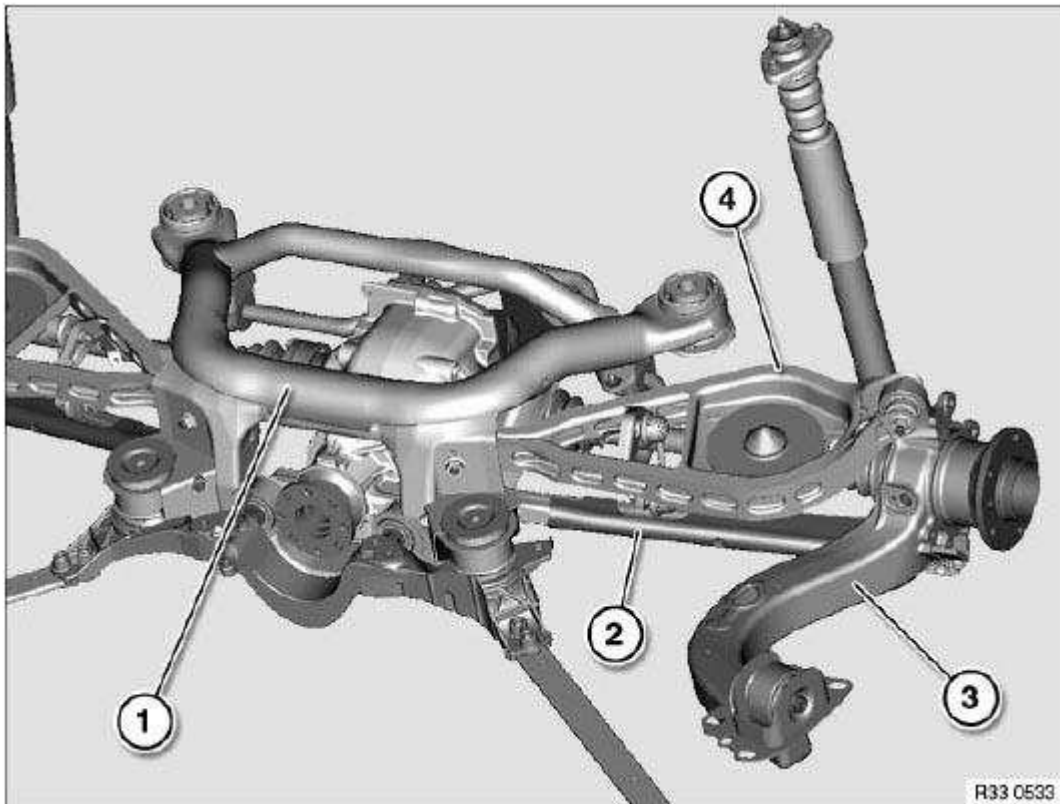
Rear Axle Carrier, Lower Control Arm And Trailing Arm
